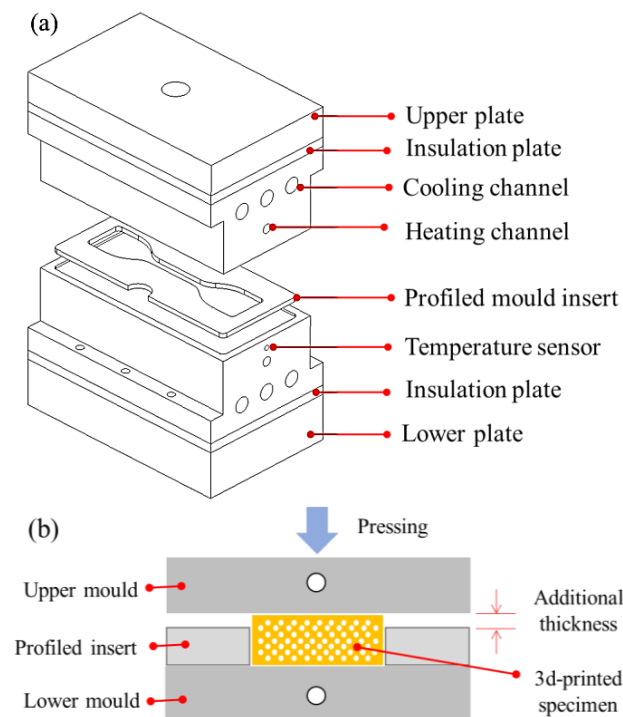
(a) Configuration of constrained remelting apparatus for 3d-printed specimens, (b) Description of the additional thickness of a specimen.
